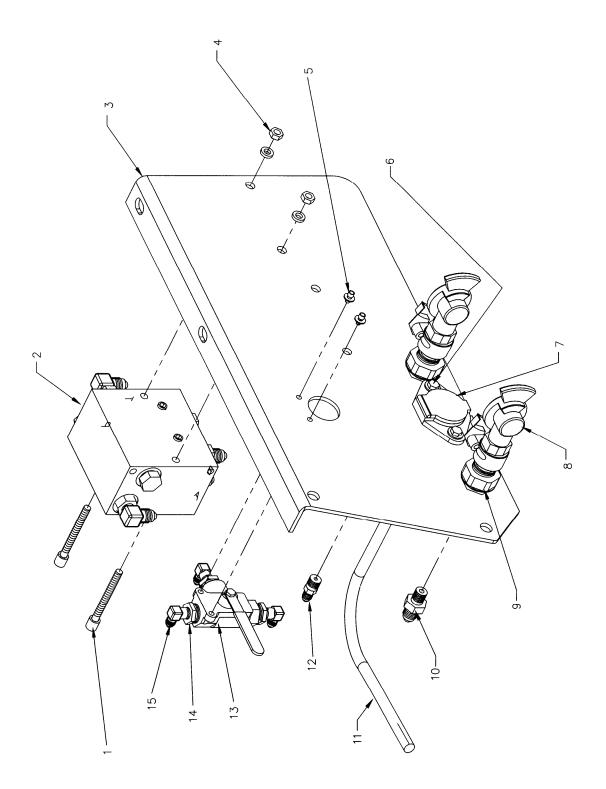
Panel Manifold, Glad Hand and Socket Assembly
